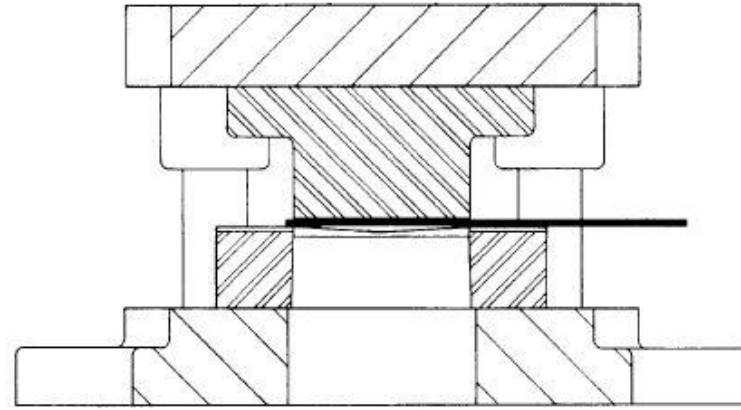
Alternate die block configuration for employing shear in producing large blanks.
